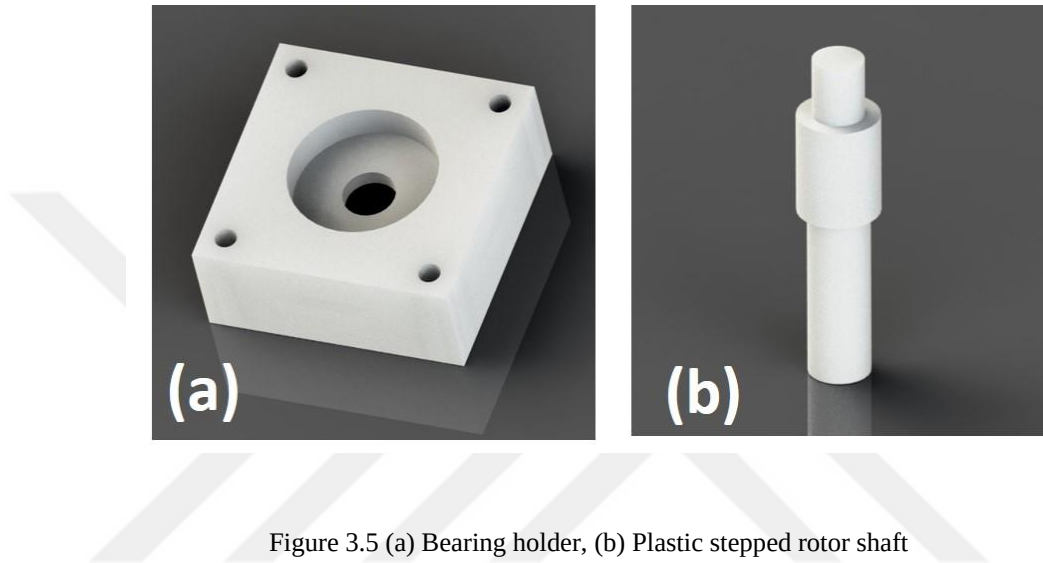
(a) Bearing holder, (b) Plastic stepped rotor shaft
